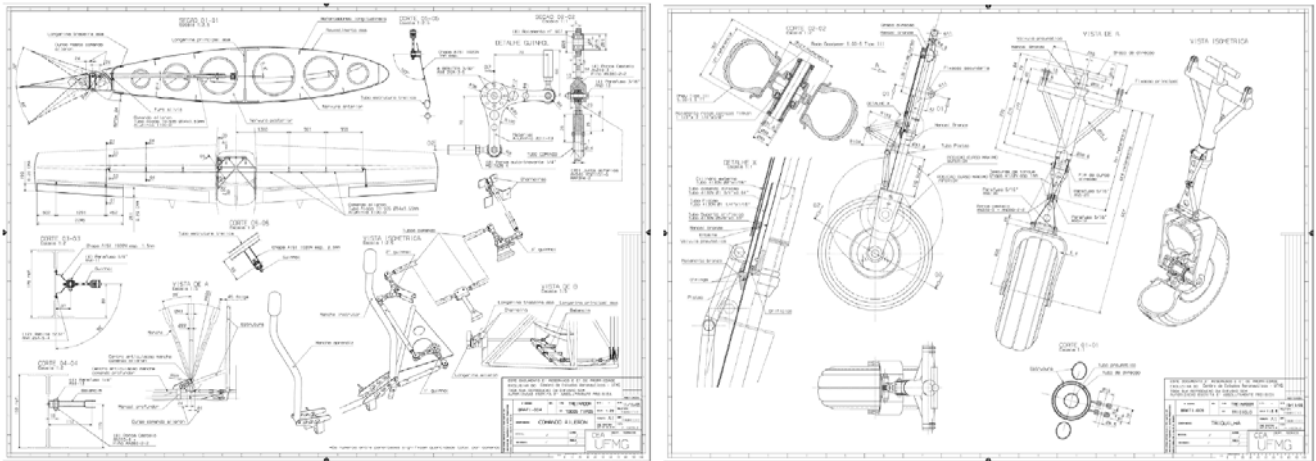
Detailed drawings for manufacturing of aircraft Brati
